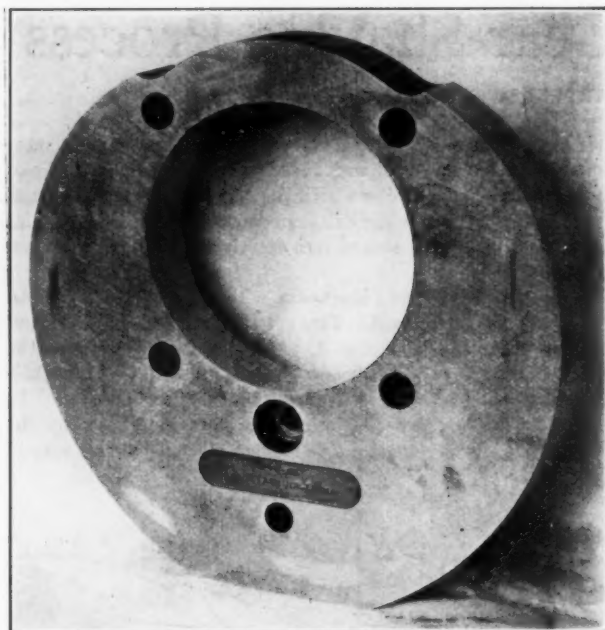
MASTER CAM FOR 18-TOOTH, 6-DIAMETRAL PITCH, 20-DEG. GEAR
